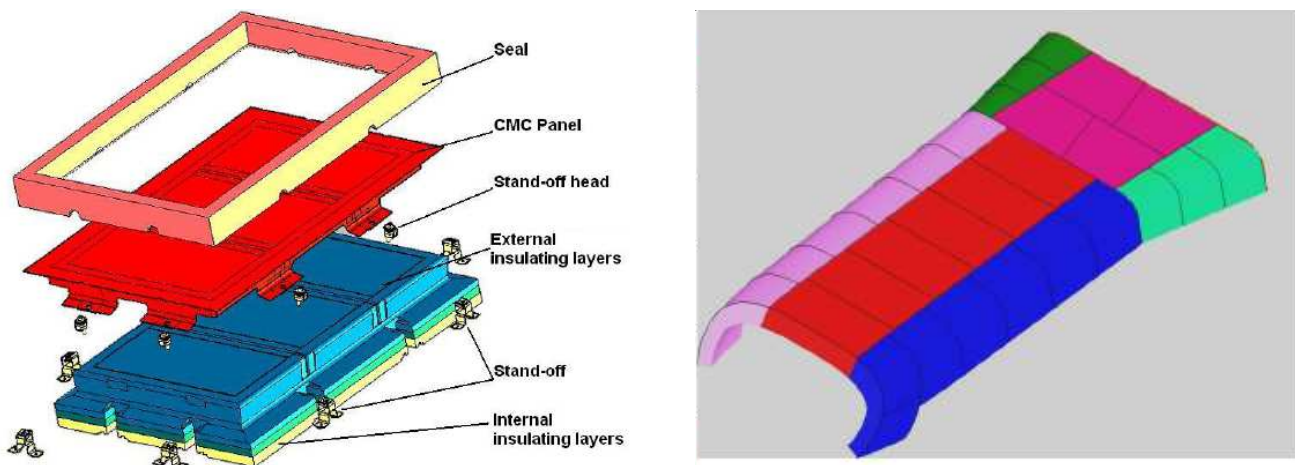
Shingle exploded view (left side) and Windward C/SiC Assembly pattern (right side)
